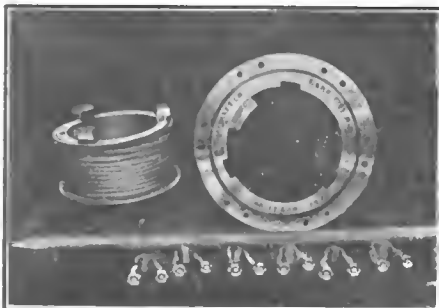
Auto Draft and Parts, which is Used to Pull an Automobile out of the Mud
